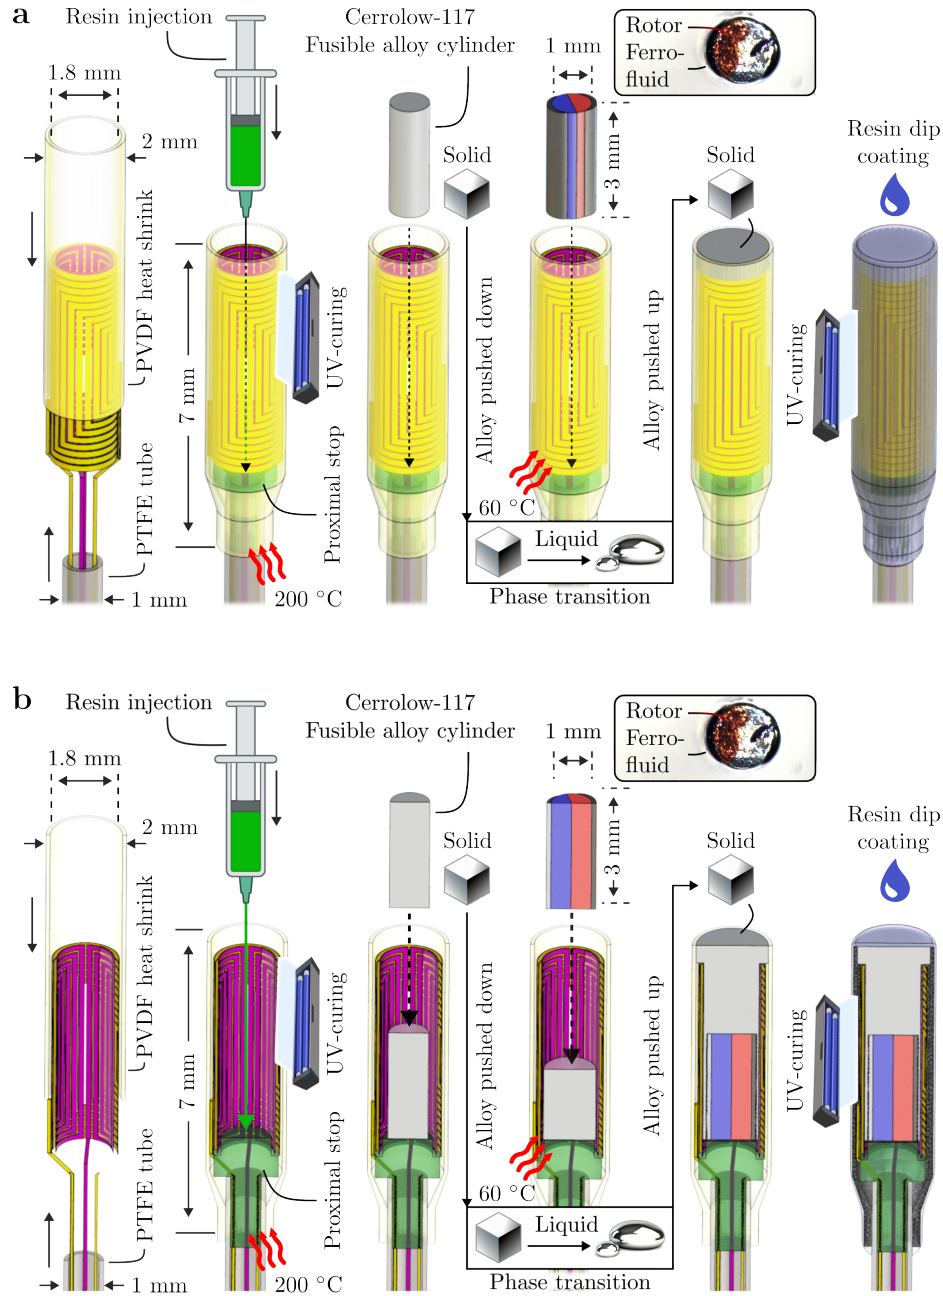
Fabrication process of the permanent magnet synchronous motor. a Non-cross-sectional view of fabrication steps. b Cross-section view showing internal arrangements of components.
